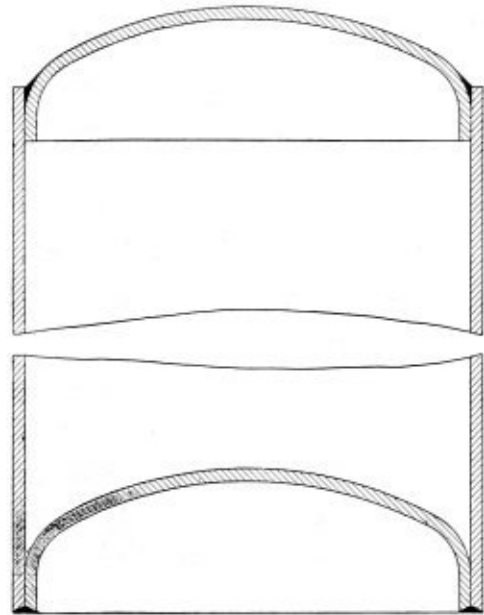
Sectional View, Showing Arrangement of Heads and Location of Welded Seams
